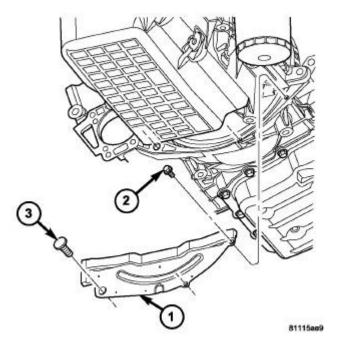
Torque Converter Dust Shield Courtesy of CHRYSLER LLC
